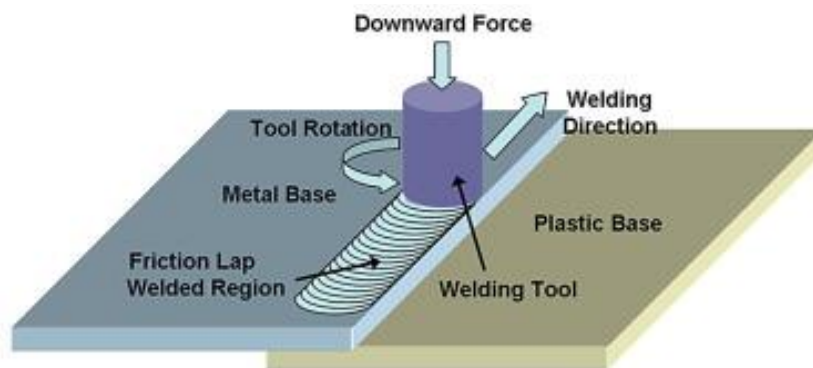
Friction Lap Welding process for joining polymer to metal. From Liu et al[149].
